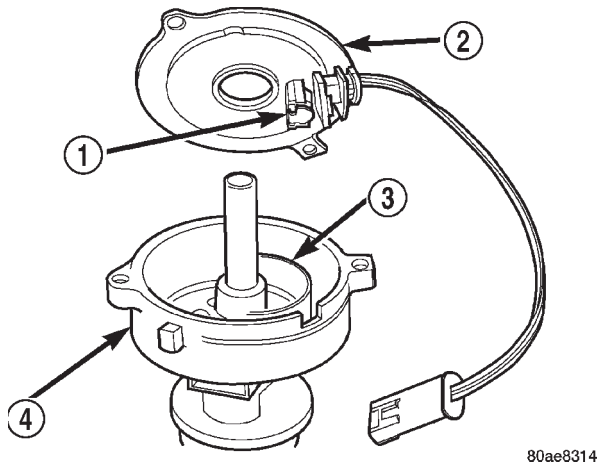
Distributor and Camshaft Position Sensor-2.5L Engine
